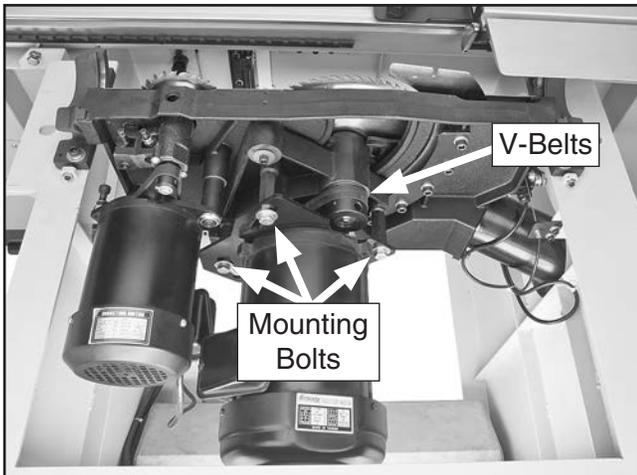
Locations of main motor mounting bolts (cast iron table removed).
